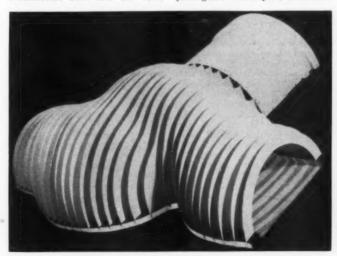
Early design step is making templates of inner and outer surfaces. Fig. 11 . . . Half-section plaster cast.
